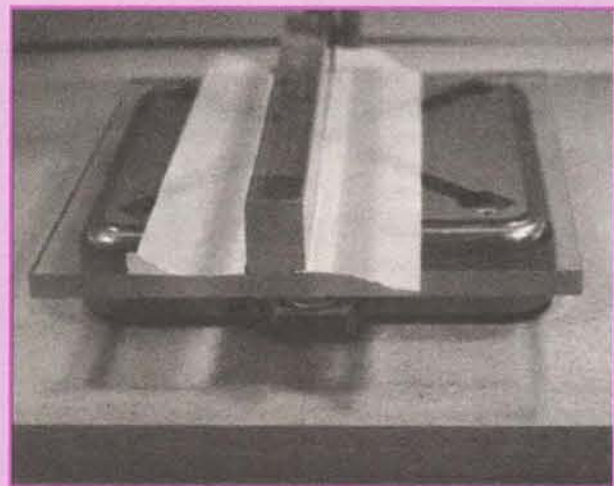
Glue the right-hand guide piece in place. Note that the lower edge is exactly parallel with the edge of the base. Check this alignment on the upper edge as well.
